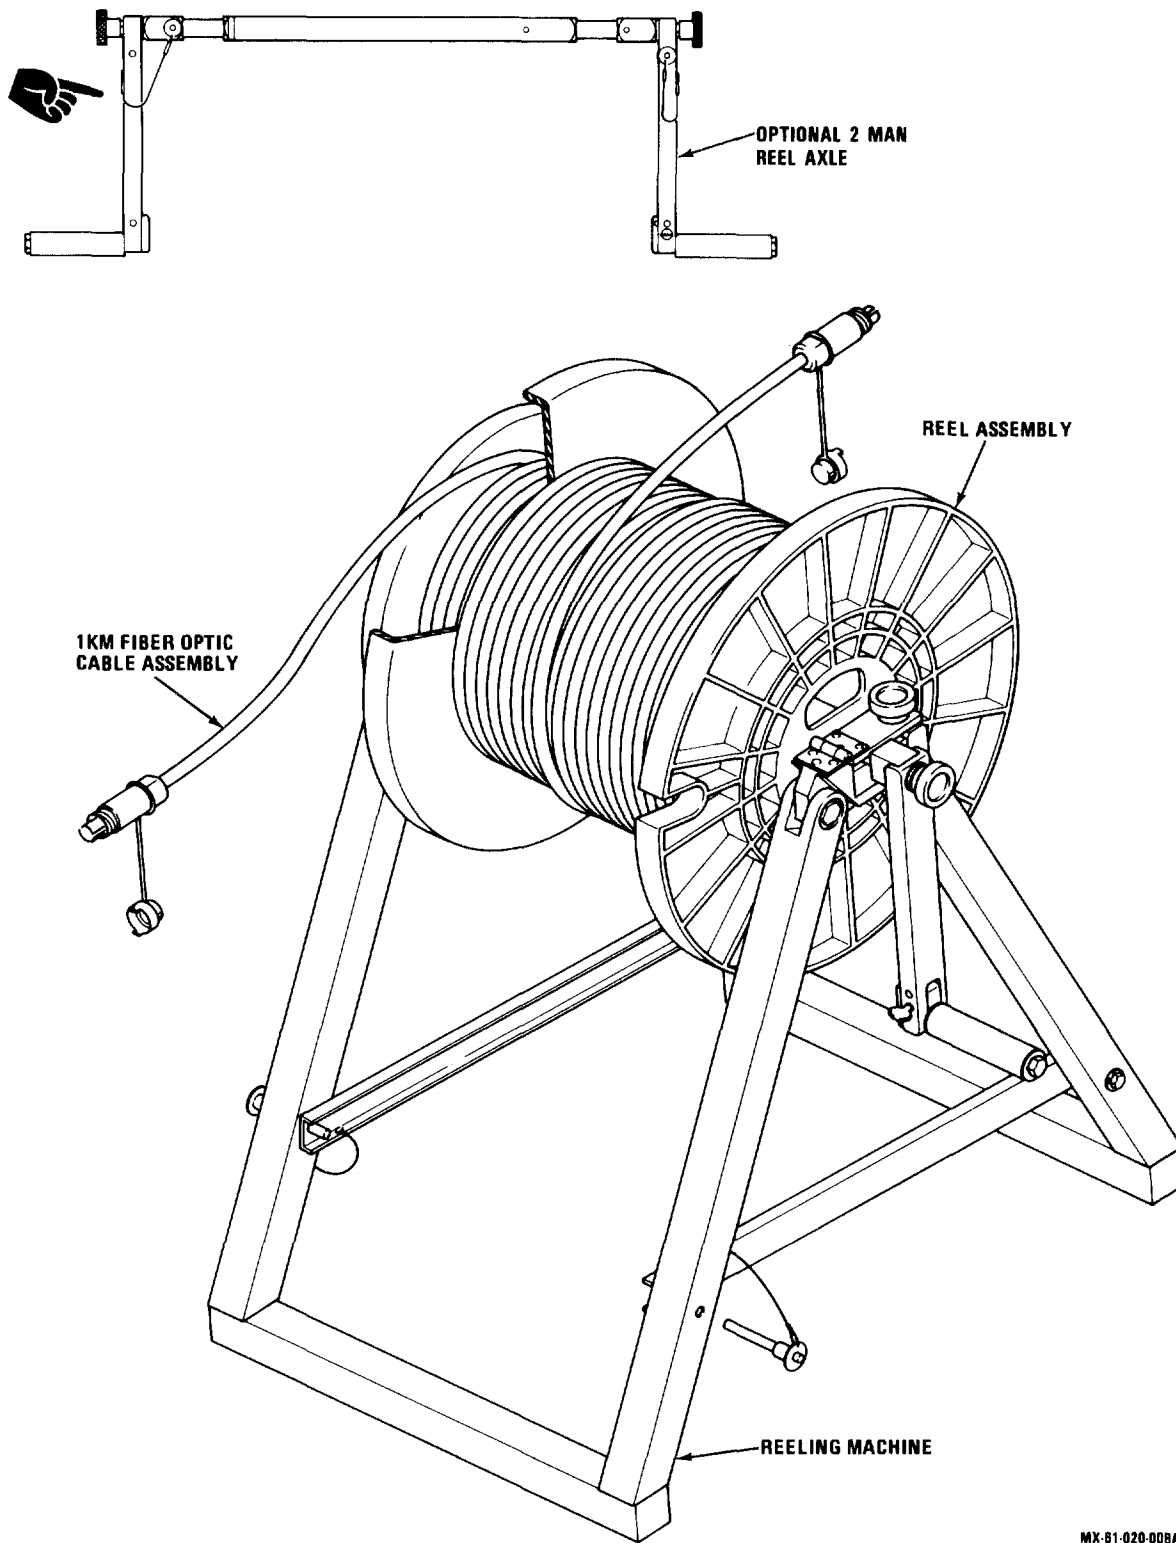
Reeling Machine with Fiber Optic Cable and Reel Assembly
